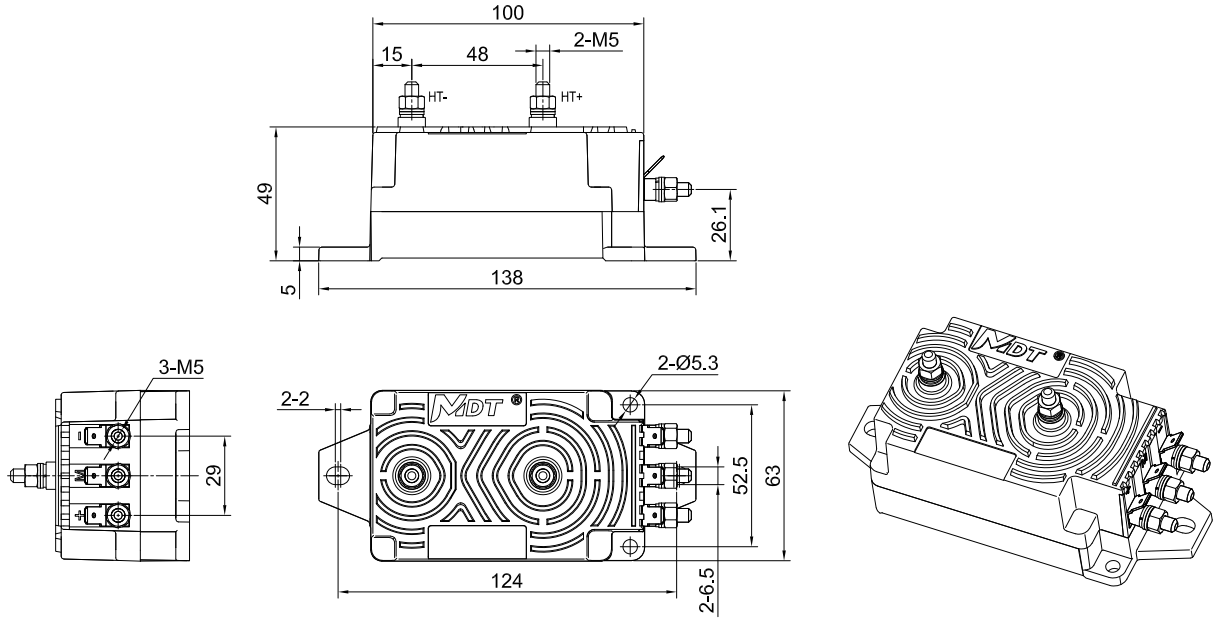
Dimension (unit: mm, tolerances for unmarked scales  $\pm 1$  mm)
